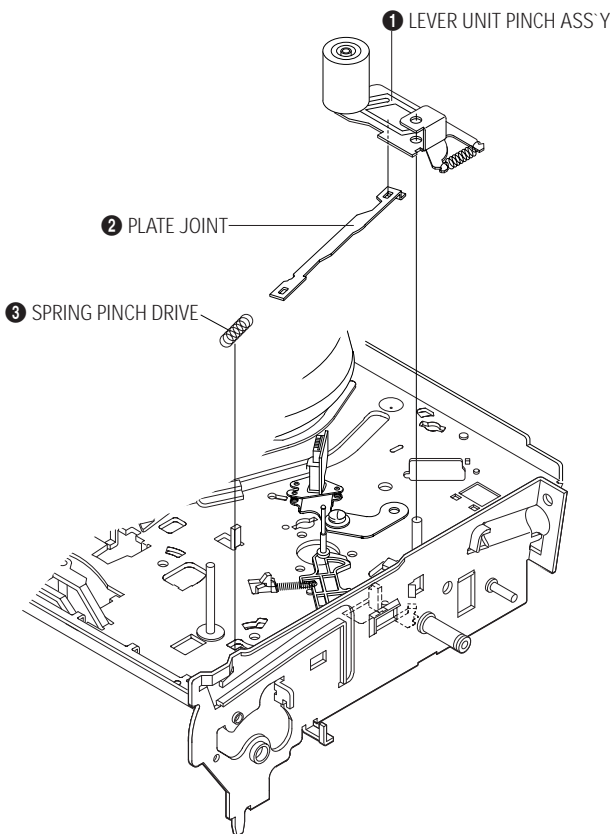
Lever Unit Pinch Ass'y, Plate Joint, Spring Pinch Drive Removal
